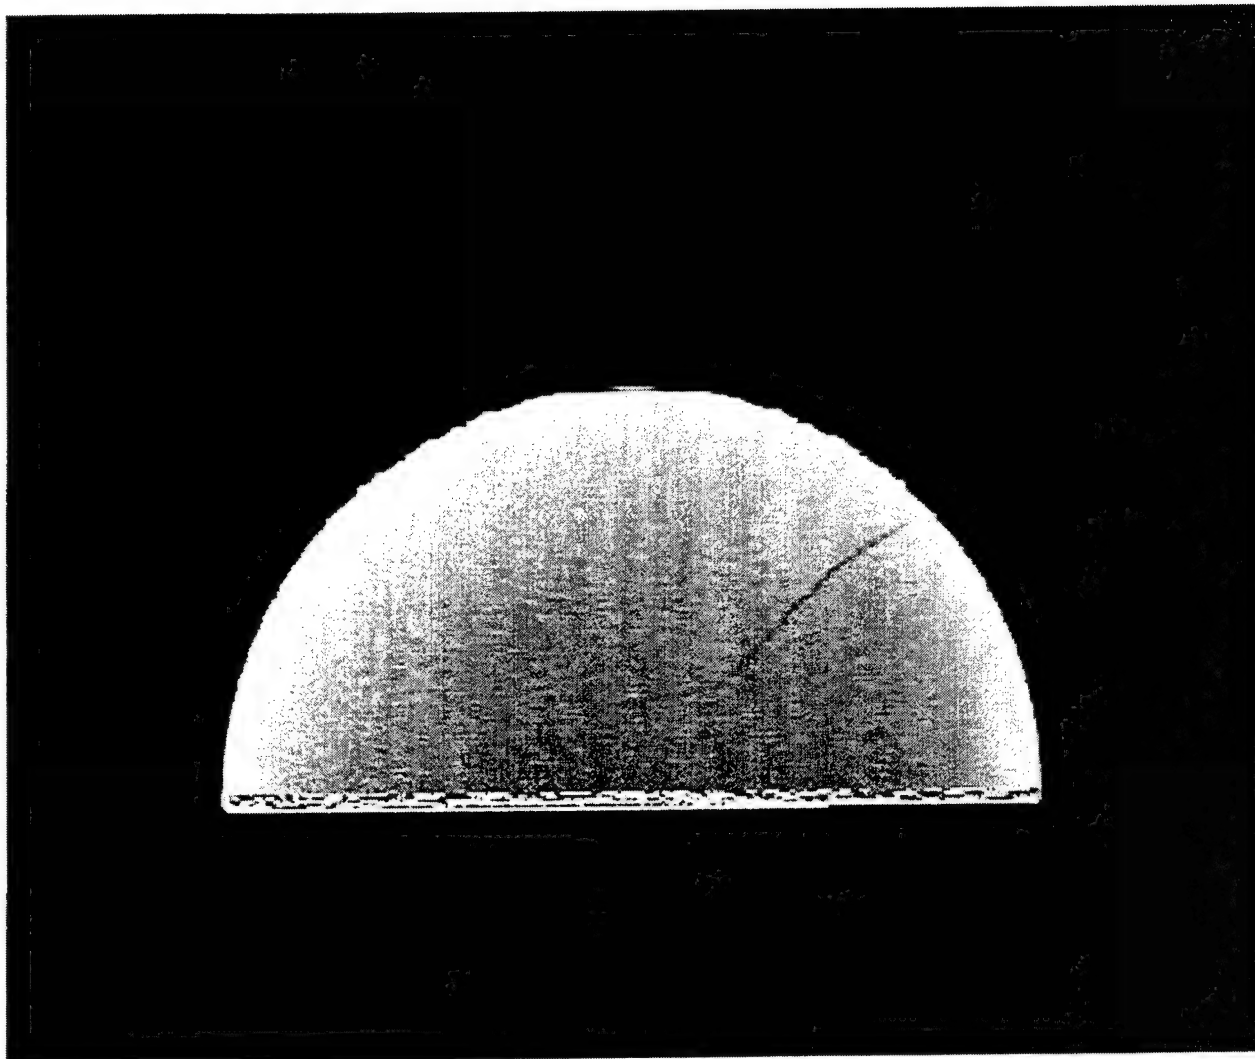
3.82 mm from bottom of disk with 65° rotation about X-axis.
